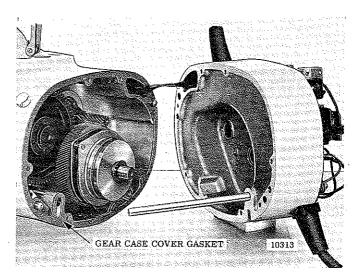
Gear Case Cover With Electrical Controls Removed From Frame
